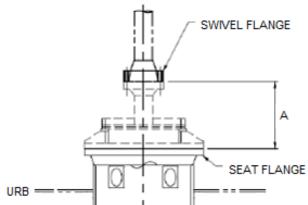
Hang-off detail of Flexible / Umbilical riser end fitting (Flange Elevation "A").
